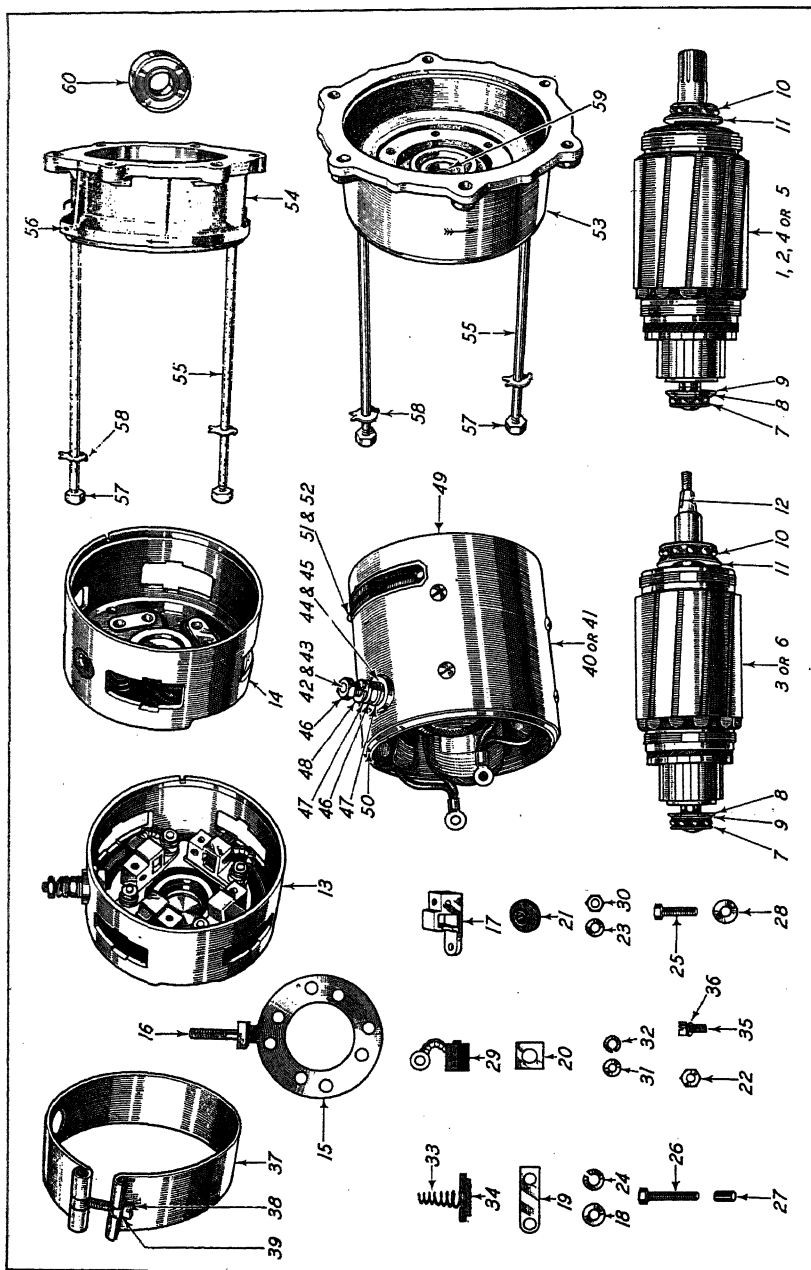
EXPLODED VIEW OF B.T.H. STARTER MOTOR TYPE CA 4125
